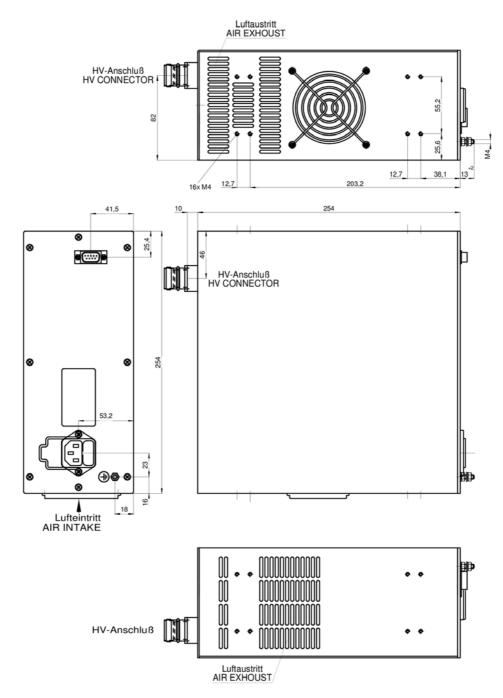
Dimensioned drawing (in mm), 30 kV  $< V_{nom} \le 70 \text{ kV}$
